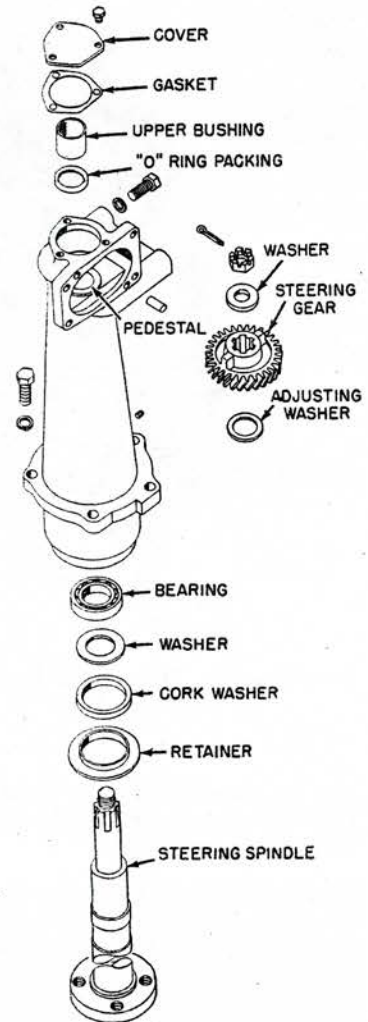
B Exploded view of Model 60 convertible front end pedestal. Model 50 is similar
